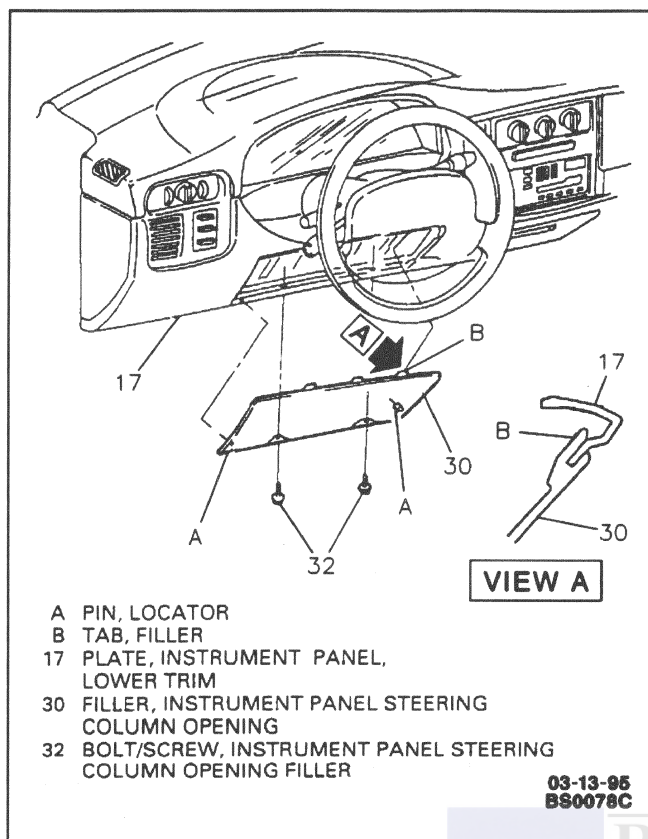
Instrument Panel Steering Column Opening Filler - (Chevrolet)
